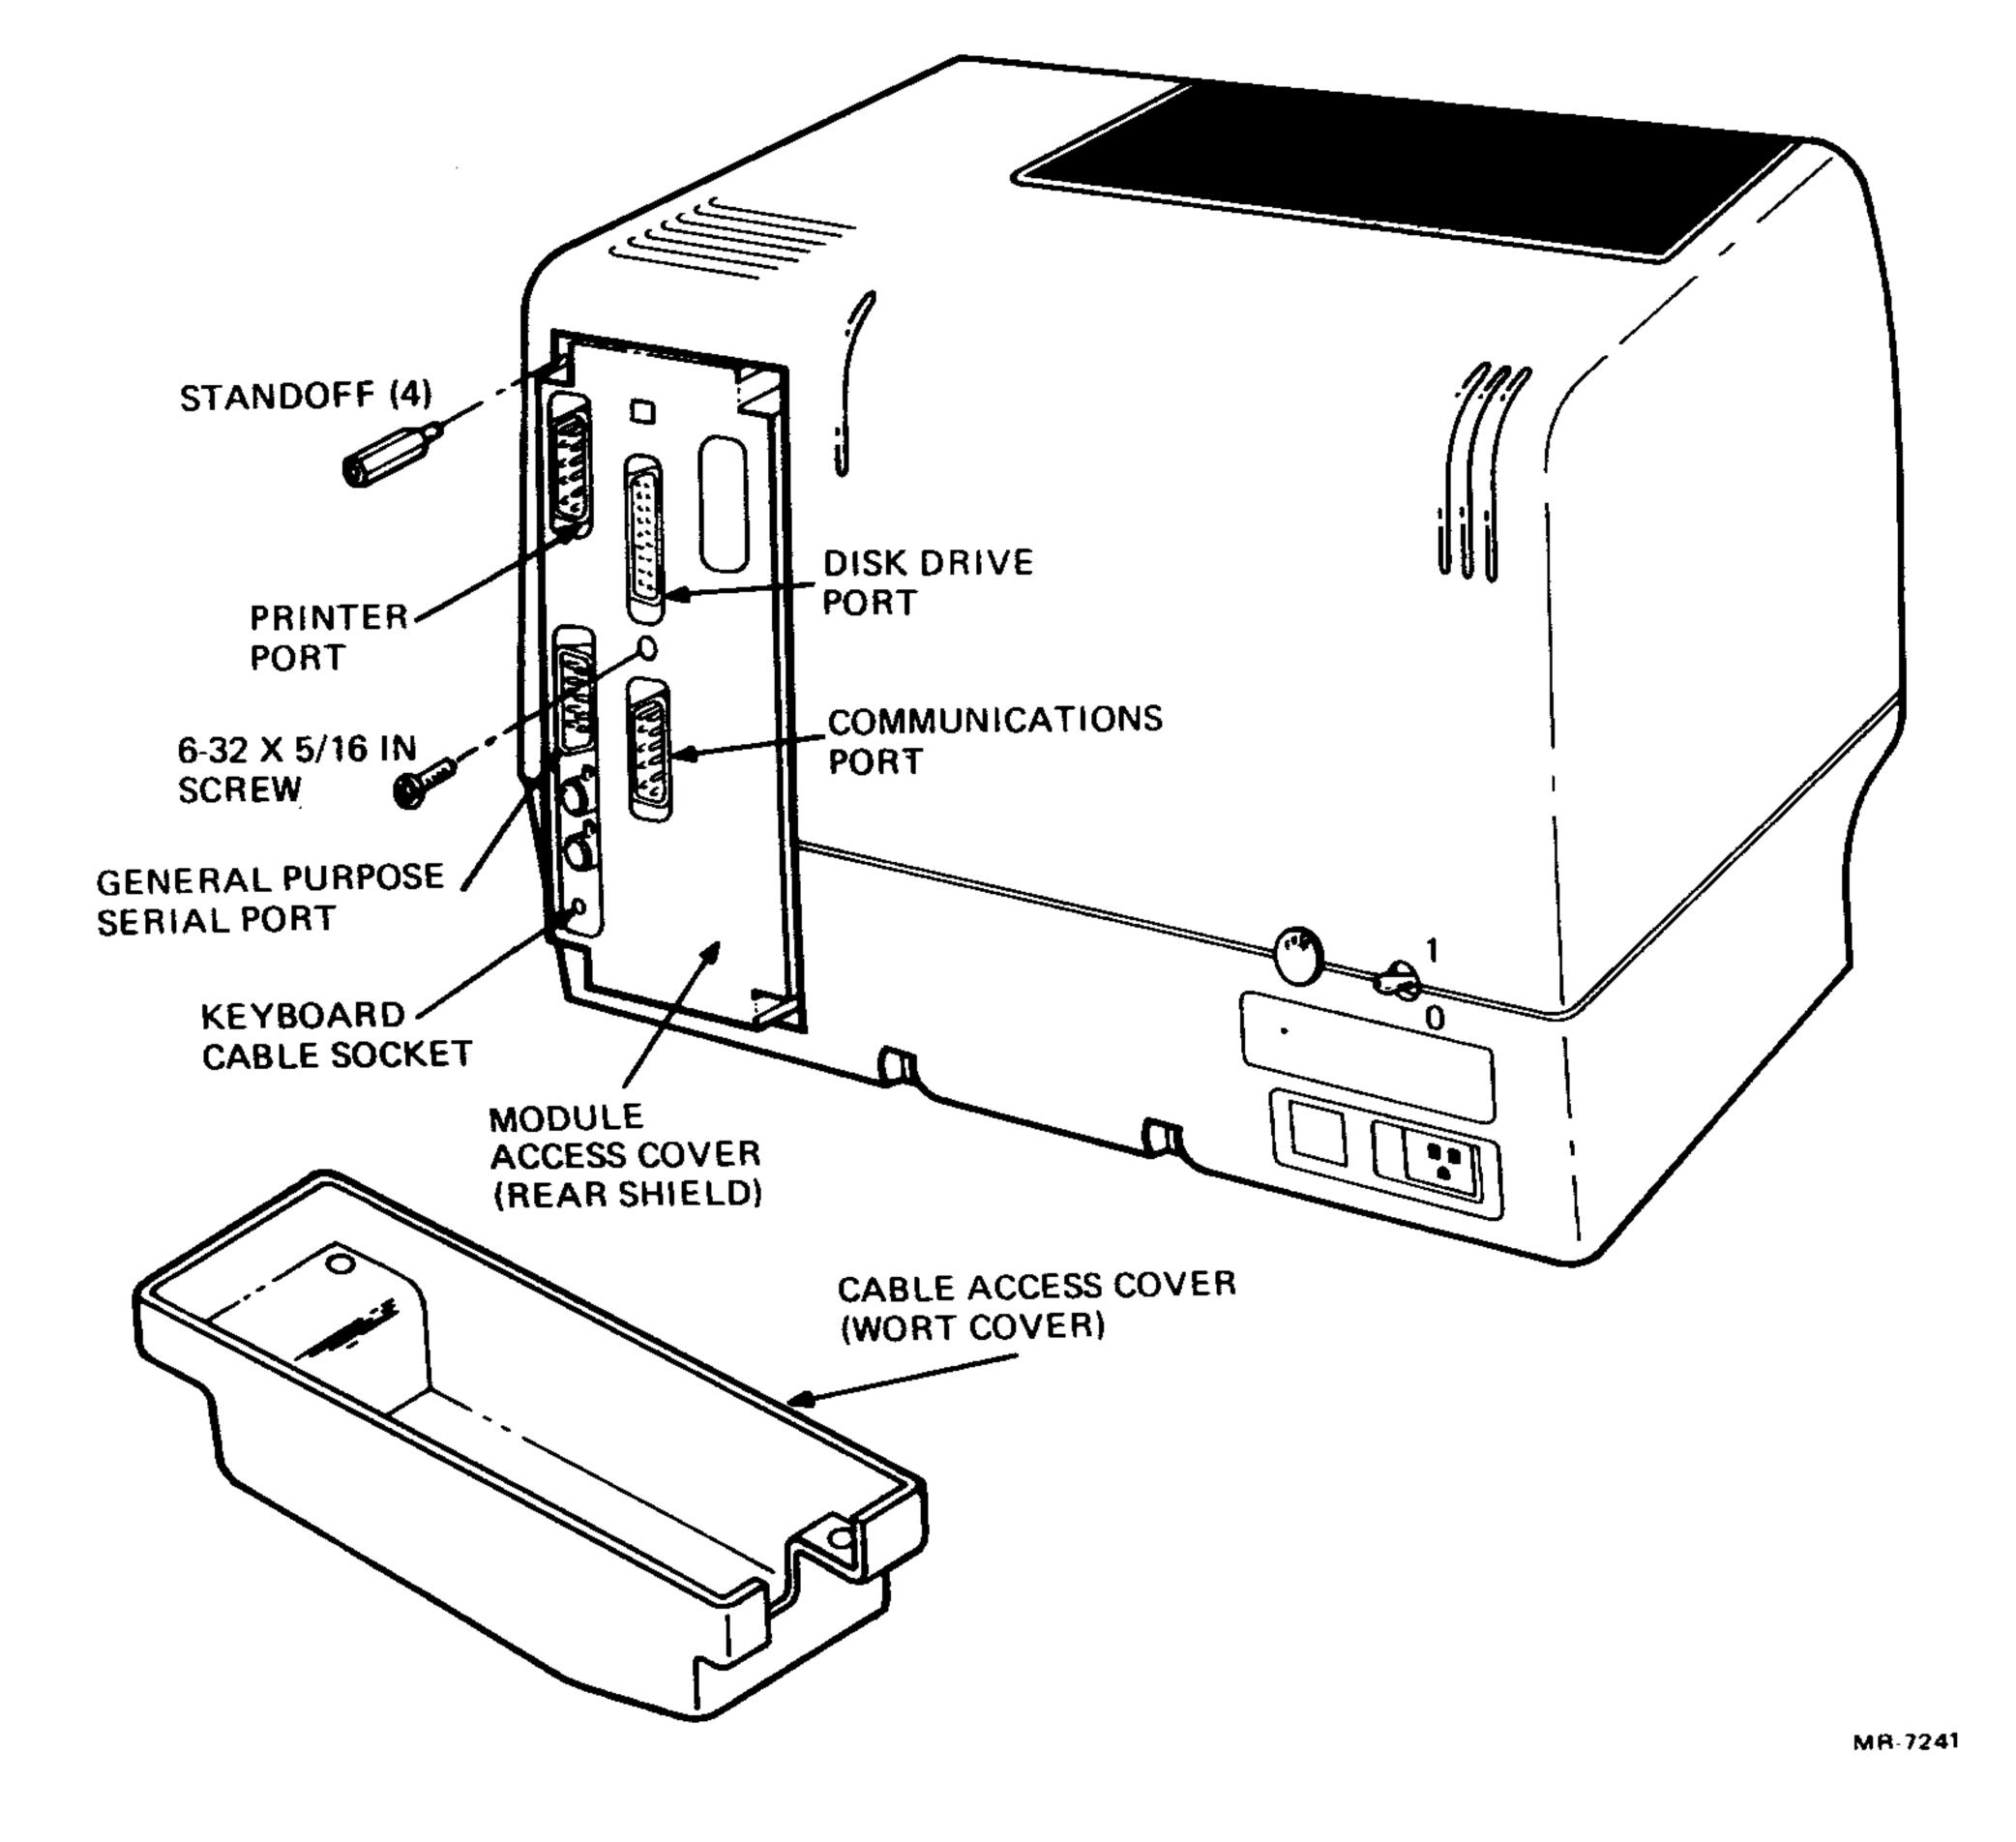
Installing the Module Access Cover (Rear Shield)
